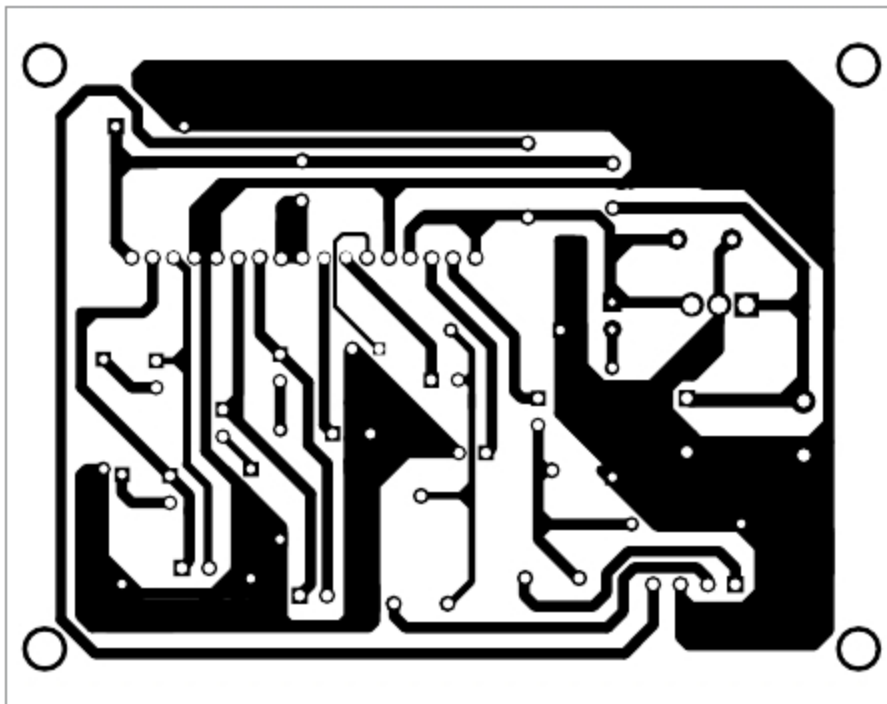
Actual-size PCB layout of 2-channel audio amplifier
